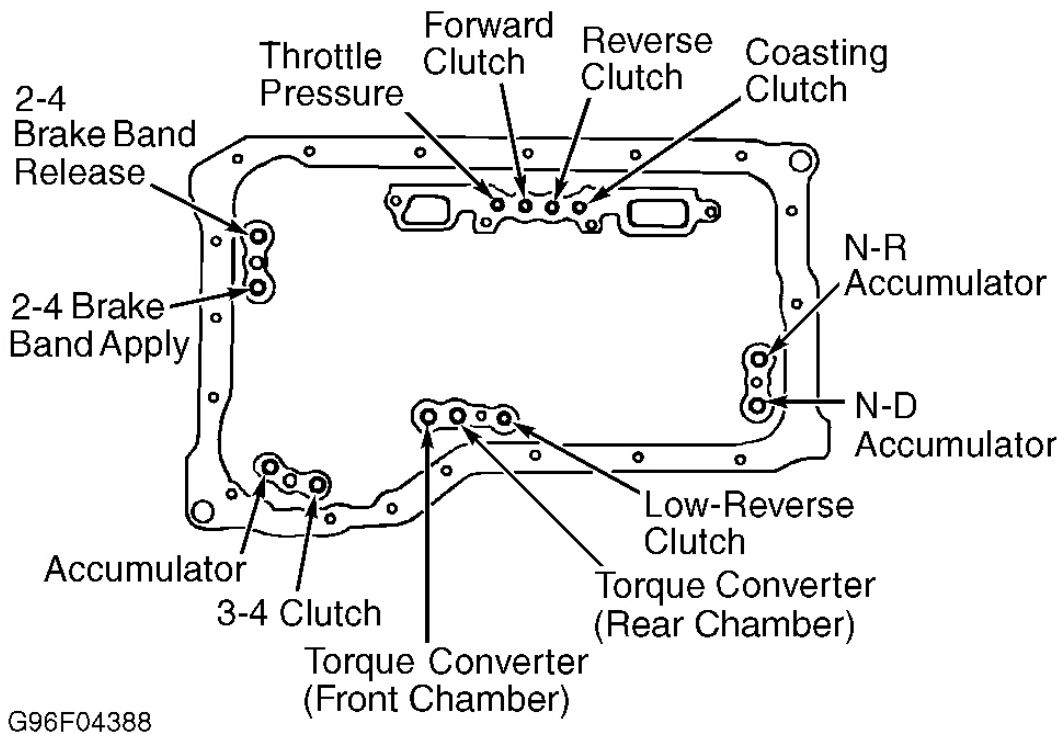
Identifying Oil Passages Transaxle Case-To-Valve Body
